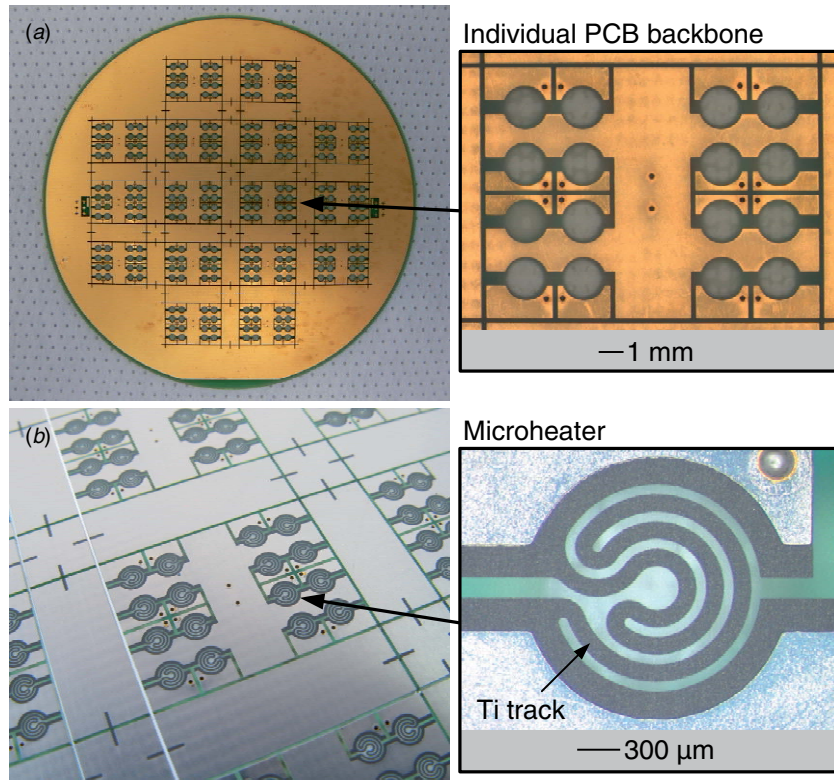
Thin film fabrication of the microheaters. (a) Multilayer PCB 100 mm disc. (b) Fabricated microheaters after deposition and etching of Ti.
